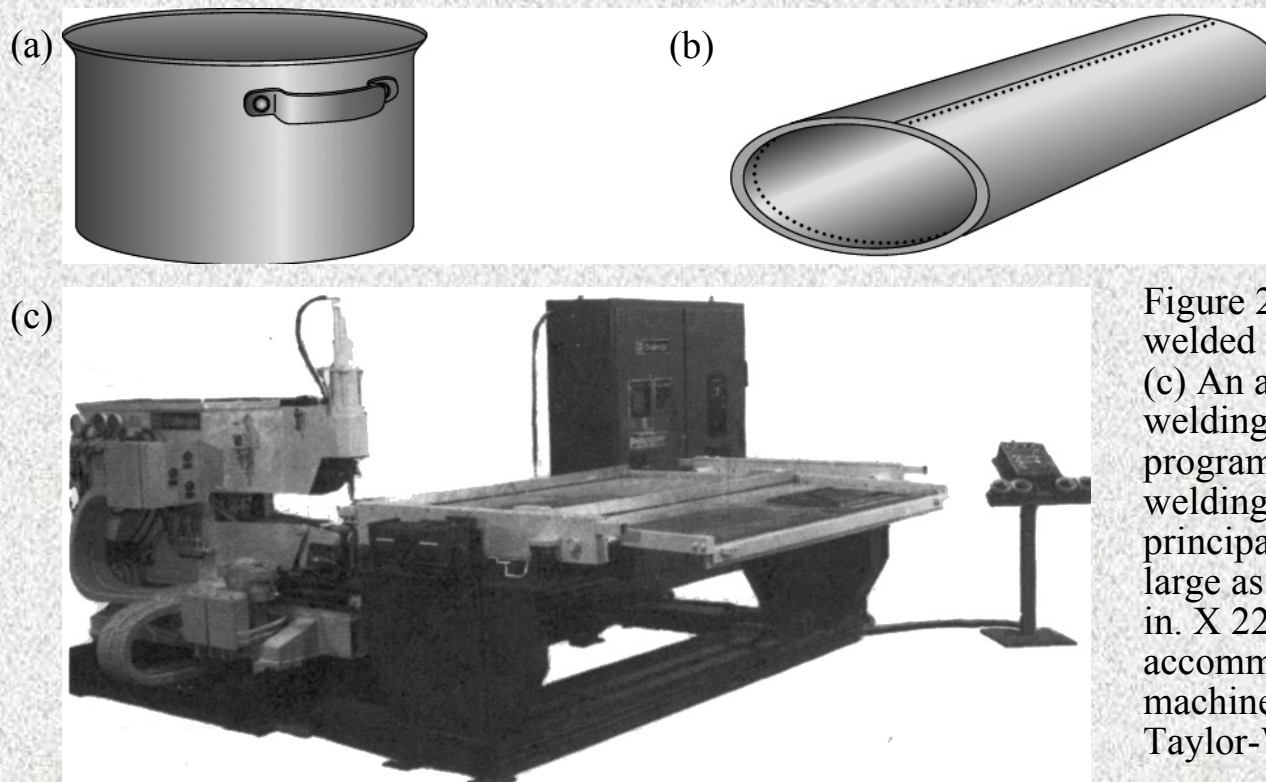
(a) and (b) Spot-welded cookware and muffler. (c) An automated spot-welding machine with a programmable robot; the welding tip can move in three principal directions. Sheets as large as 2.2 m X 0.55 m (88 in. X 22 in.) can be accommodated in this machine. *Source:* Courtesy of Taylor-Winfield Corporation.
